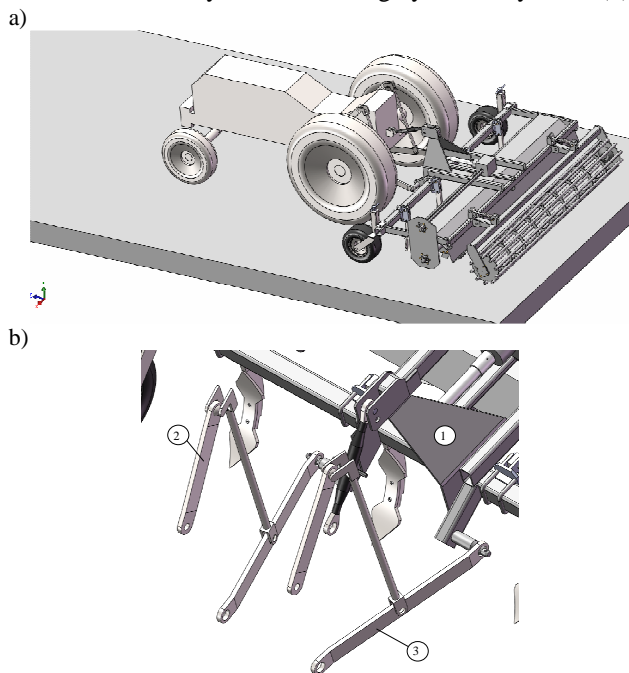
Kinematic calculation model of tractor with cultivation tool (a), View of the tractor three-point hitch linkage (b)
